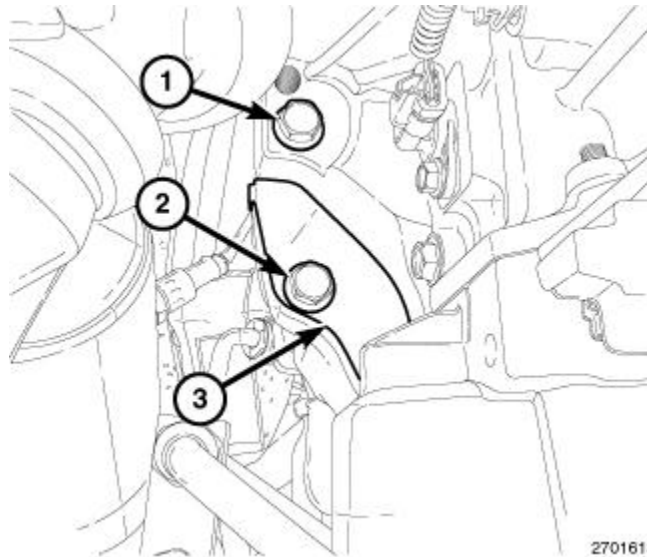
Side Engine-To-Transmission Bolt, Transmission Dust Shield Retaining Bolt & Dust Shield
